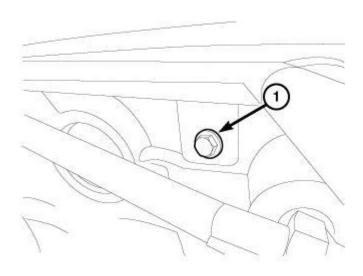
Coolant Outlet Tube Bracket Nut Courtesy of CHRYSLER GROUP, LLC
